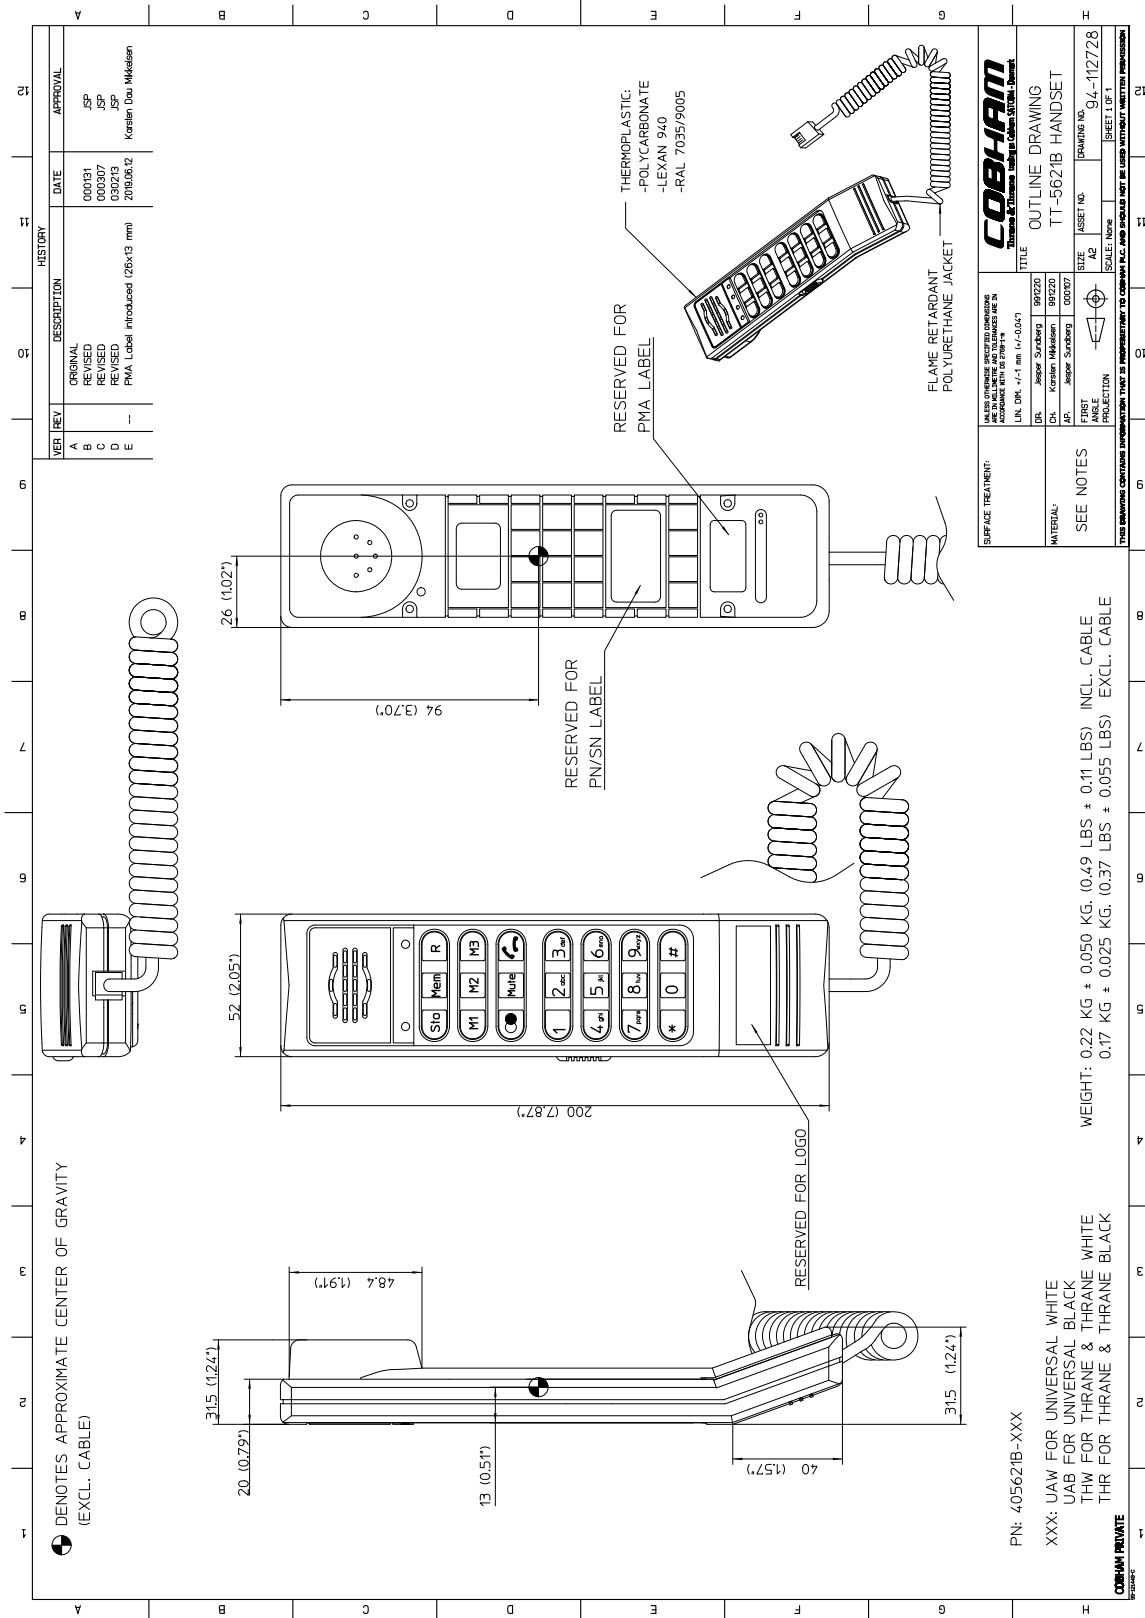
Outline drawing: TT-5621B 2-Wire Handset
